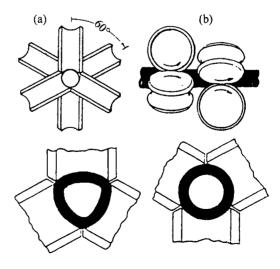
Schematic diagram of reducing tube with a 3-roll roller die, (a) oval groove; (b) round groove.
